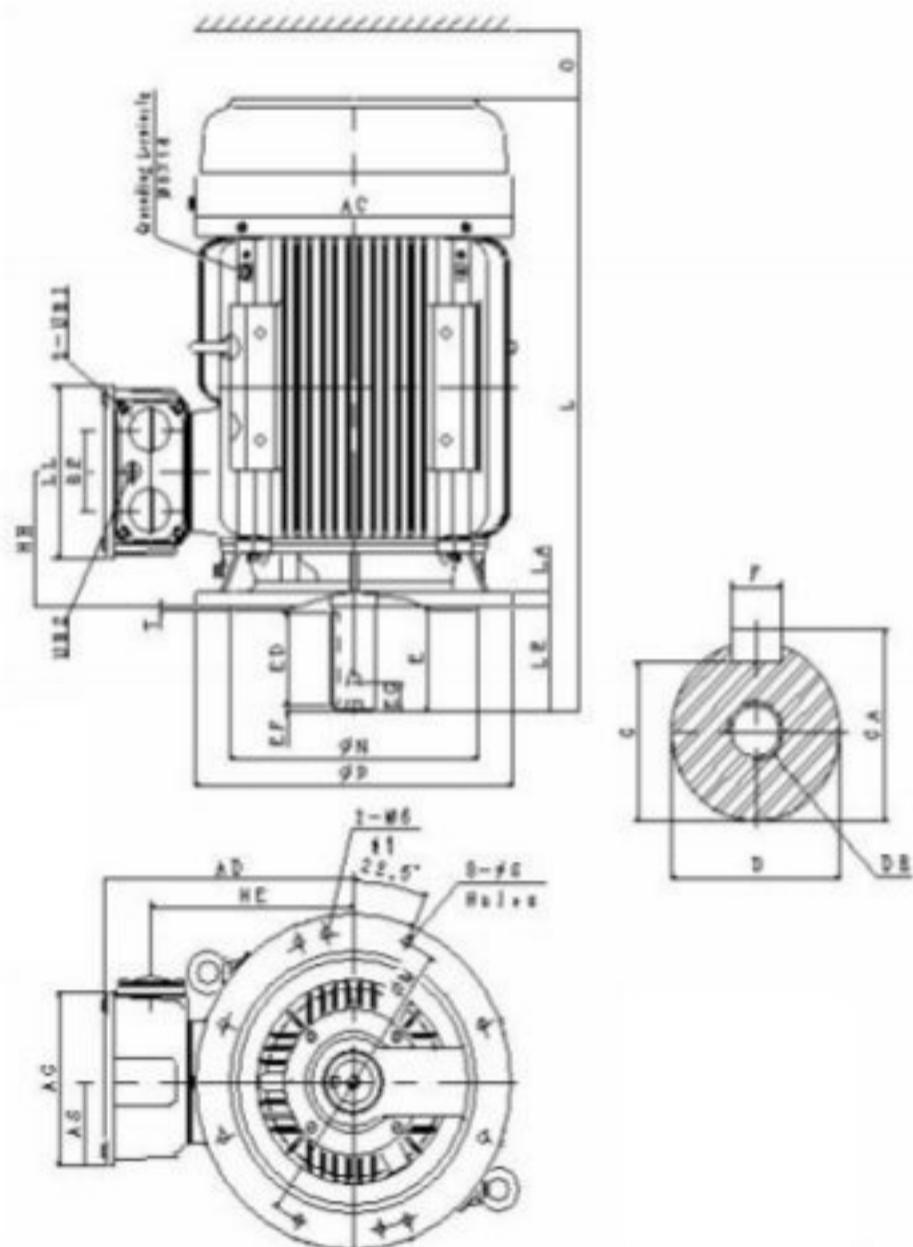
Outline drawing of cast iron design, mounting V1; frame size 225 – 250
